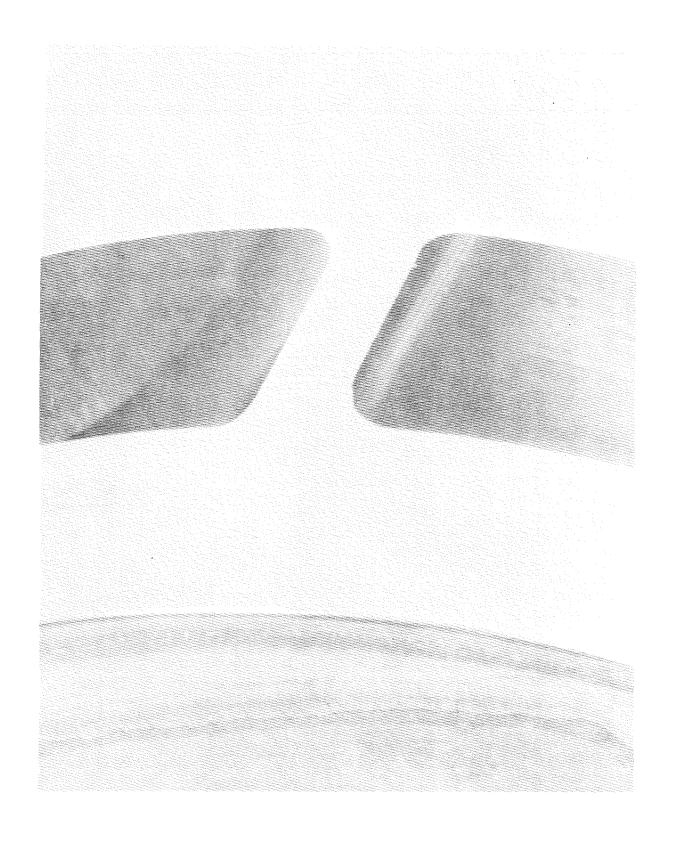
Final Simulated Impeller Sample Showing Close Up of Discharge Area After Core Removal
